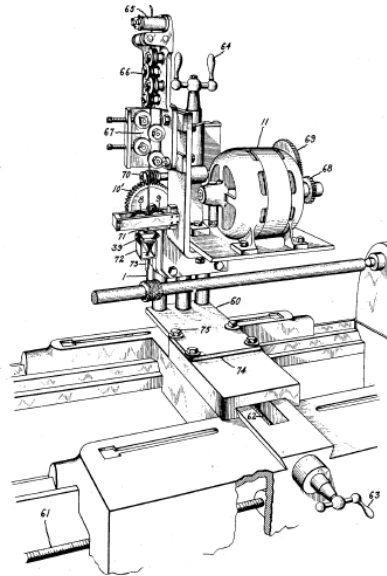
Perspective view of a wire and arc welding machine for repair and fabrication of metal shafts (Noble, 1933).
